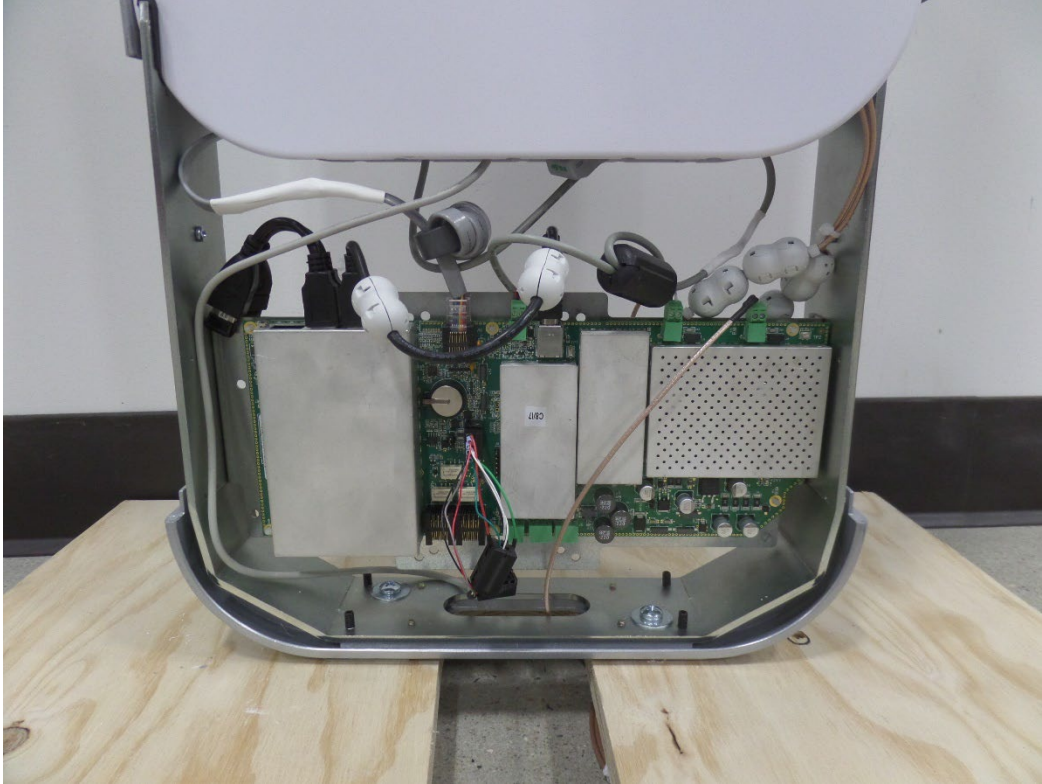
NP22 PRI/PAB LOWER BASE FRONT SIDE
